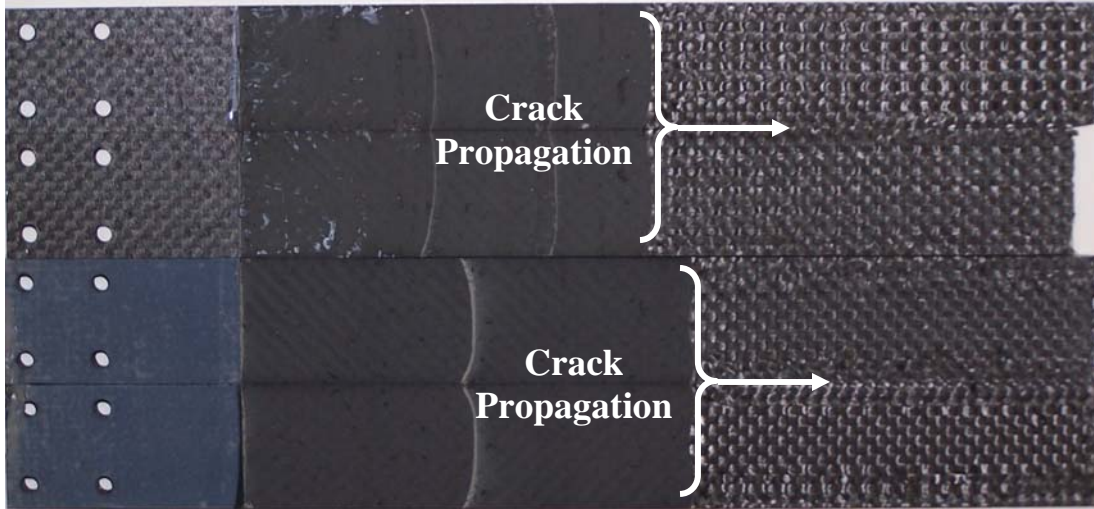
Fracture surface images for 11-ply (top) and 20-ply (bottom) ELS specimens.
